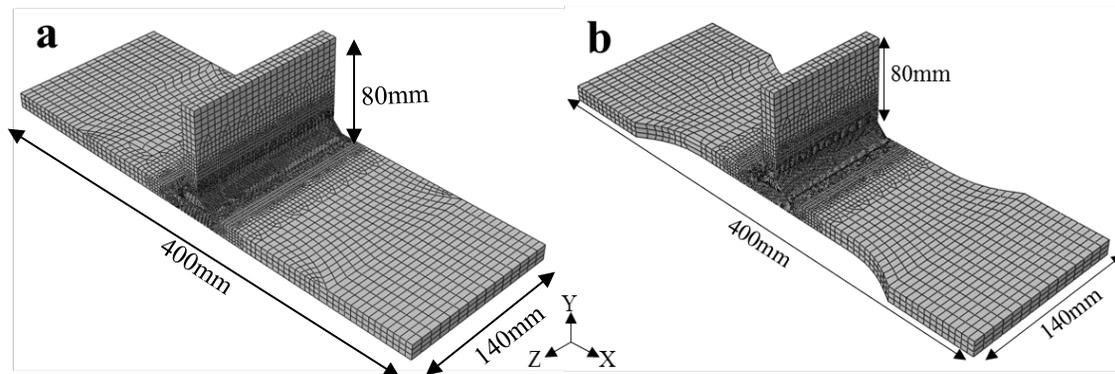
a) Initial weld model, b) test specimen model following cutting
